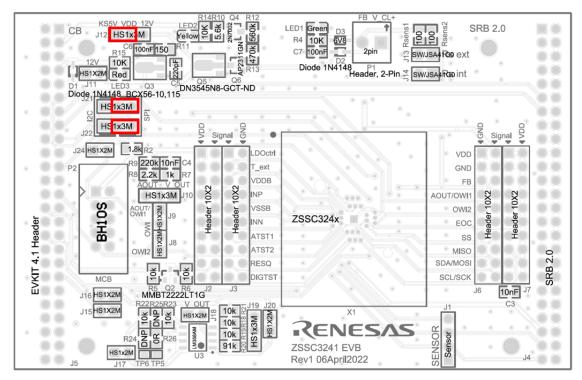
Initial Jumper Setting ZSSC3241 Evaluation Board
